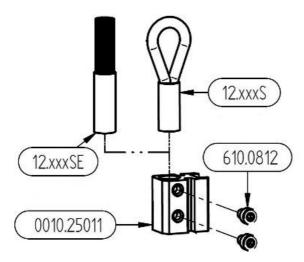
Exploded view of the head 0010.200S for 10.200RS
